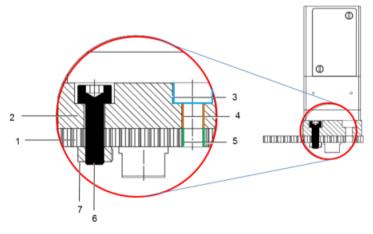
Example of alternative to recommended fastening (with through hole in the surface and nut)
